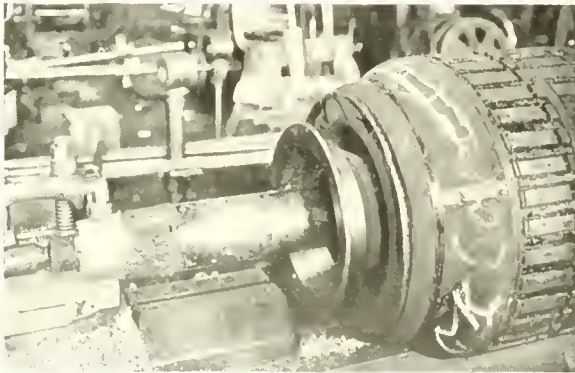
An Arc Welded shaft, which has been worked on a lathe, and is being welded again. The new weld is being made in the center of the shaft.
